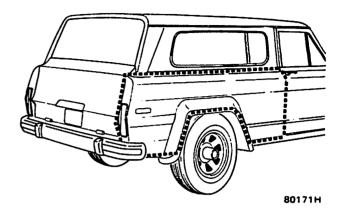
F-8 Rear Quarter Panel—2-Door Cherokee
